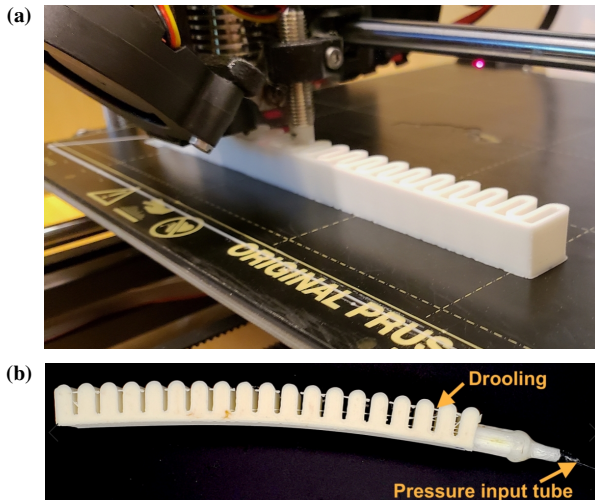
Fabrication process of the soft actuator. (a) 3D printing with an FDM 3D printer. (b) Soft actuator connected with the pressure input tube.
